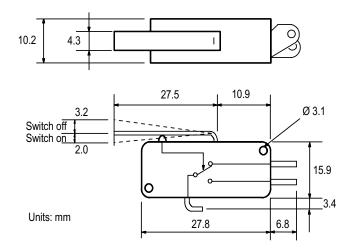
Dimensions of Interlock Switch (3101-3241)
